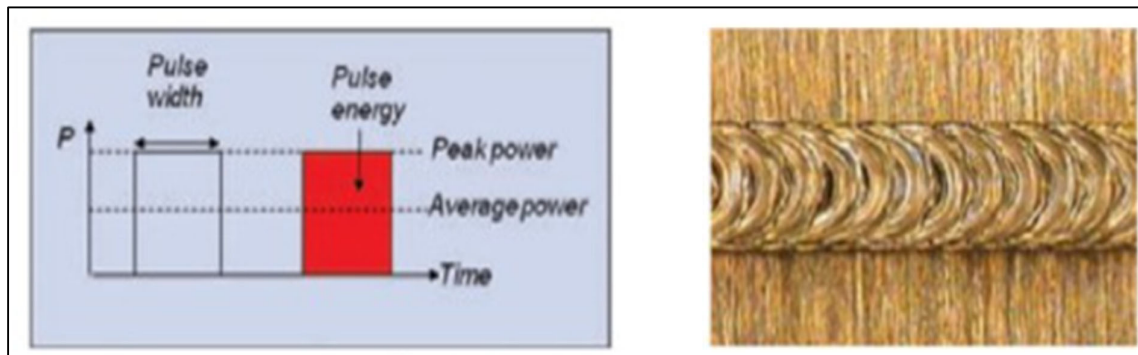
Pulsed laser power and weld bead [17]
